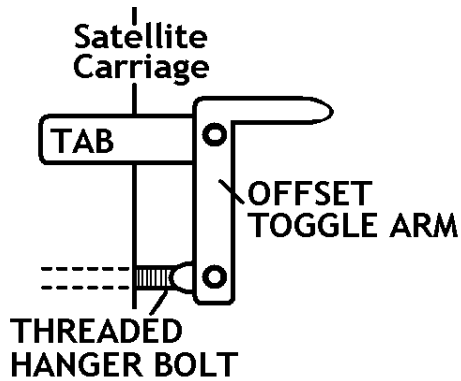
Satellite-Carriage End of Reversing Mechanism
